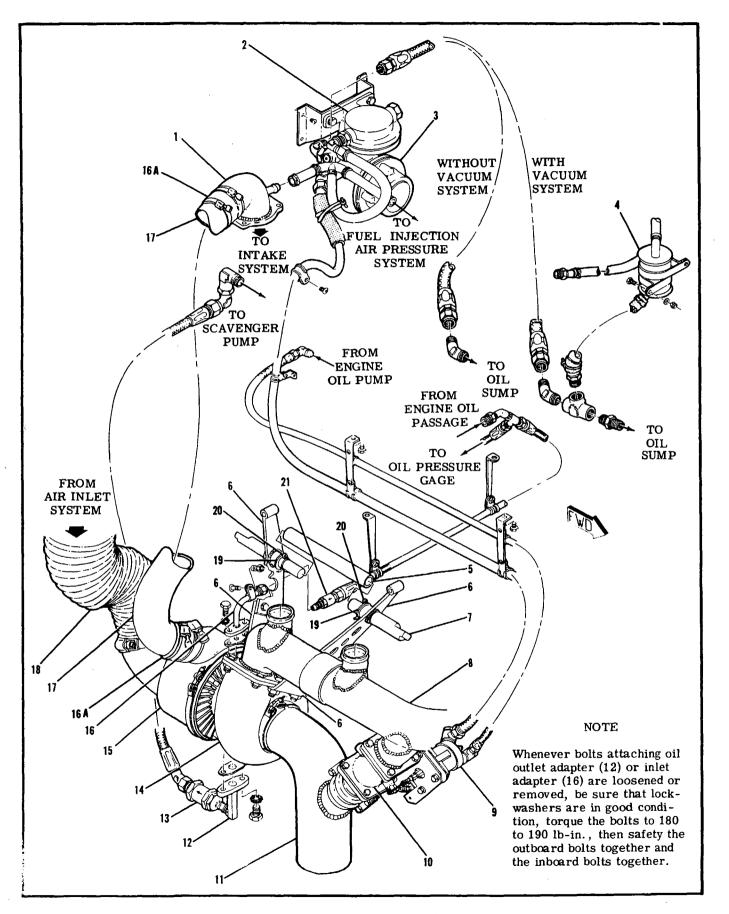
A-1. Turbocharger System (Sheet 1 of 2)
